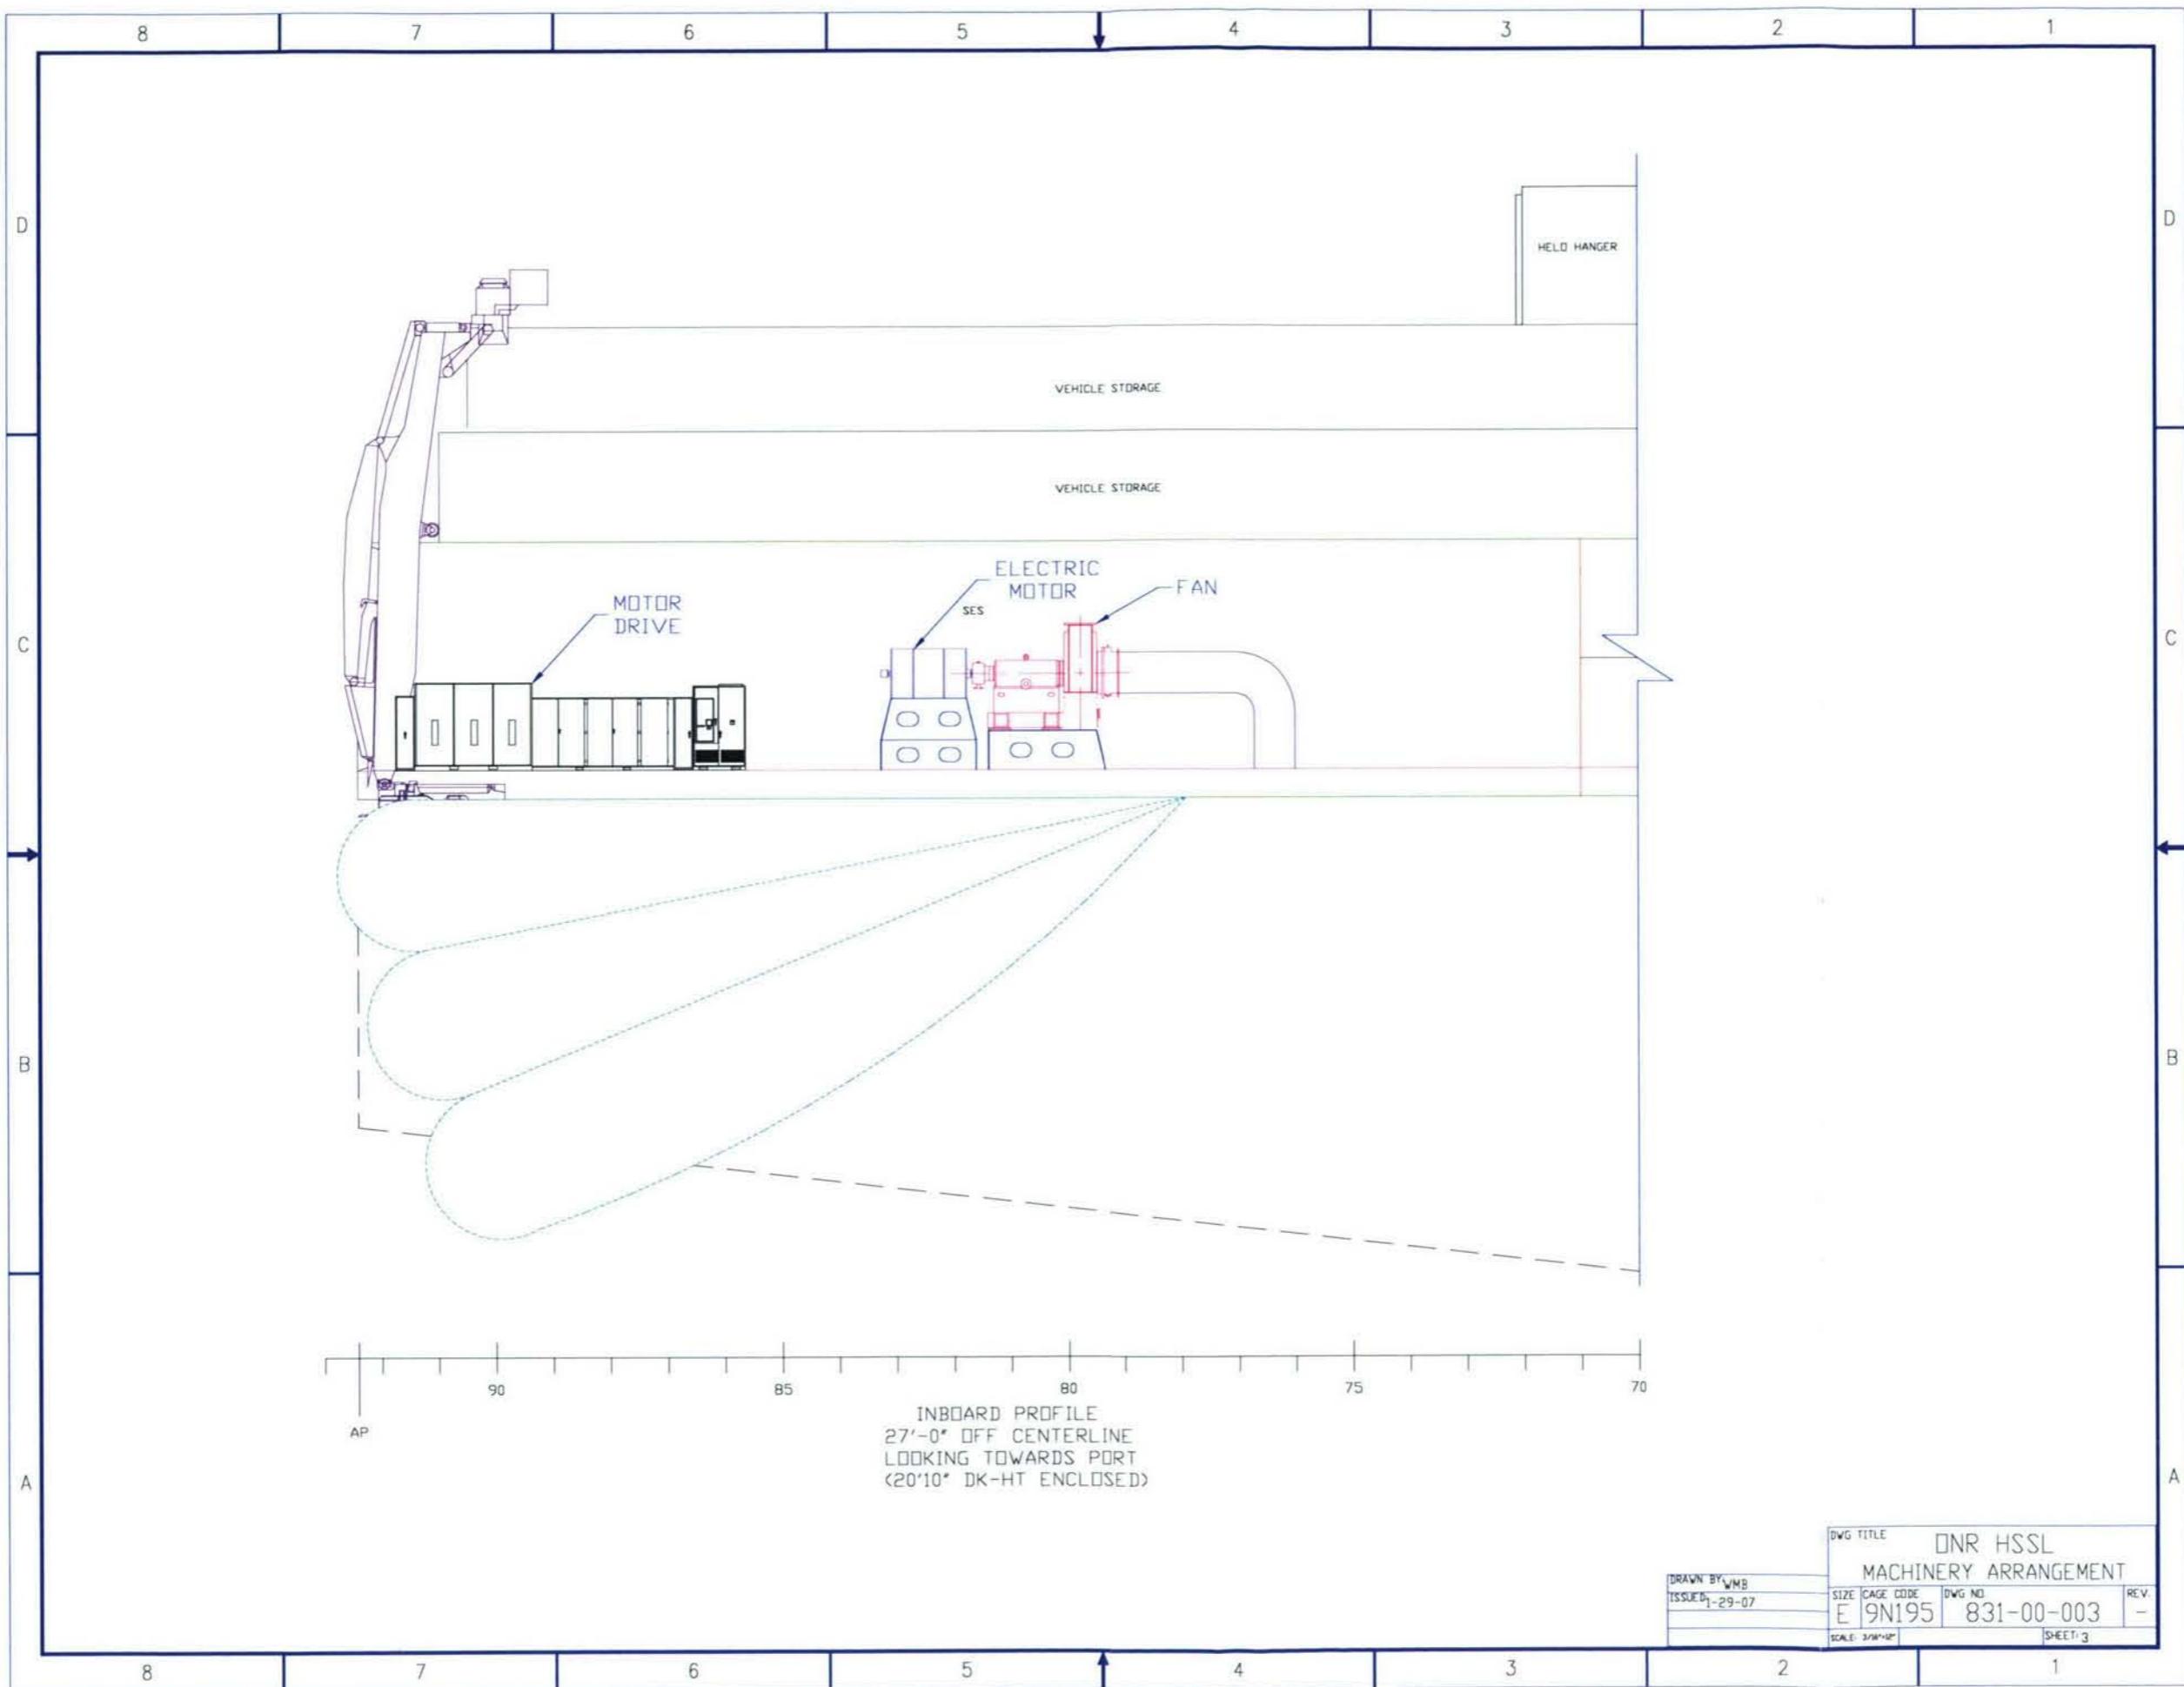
Inboard Profile of Aft Auxiliary Machinery Room
